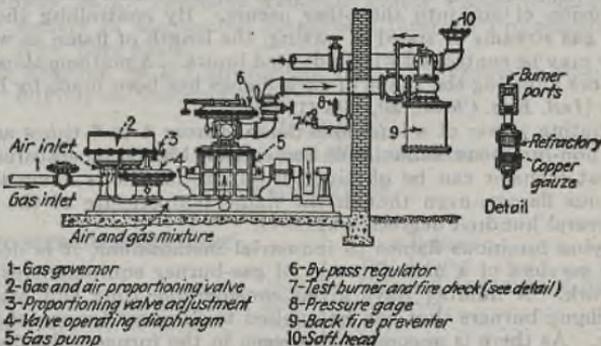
Industrial-gas air-mixture system with automatic proportioning, manifold burner type, showing burner construction.
